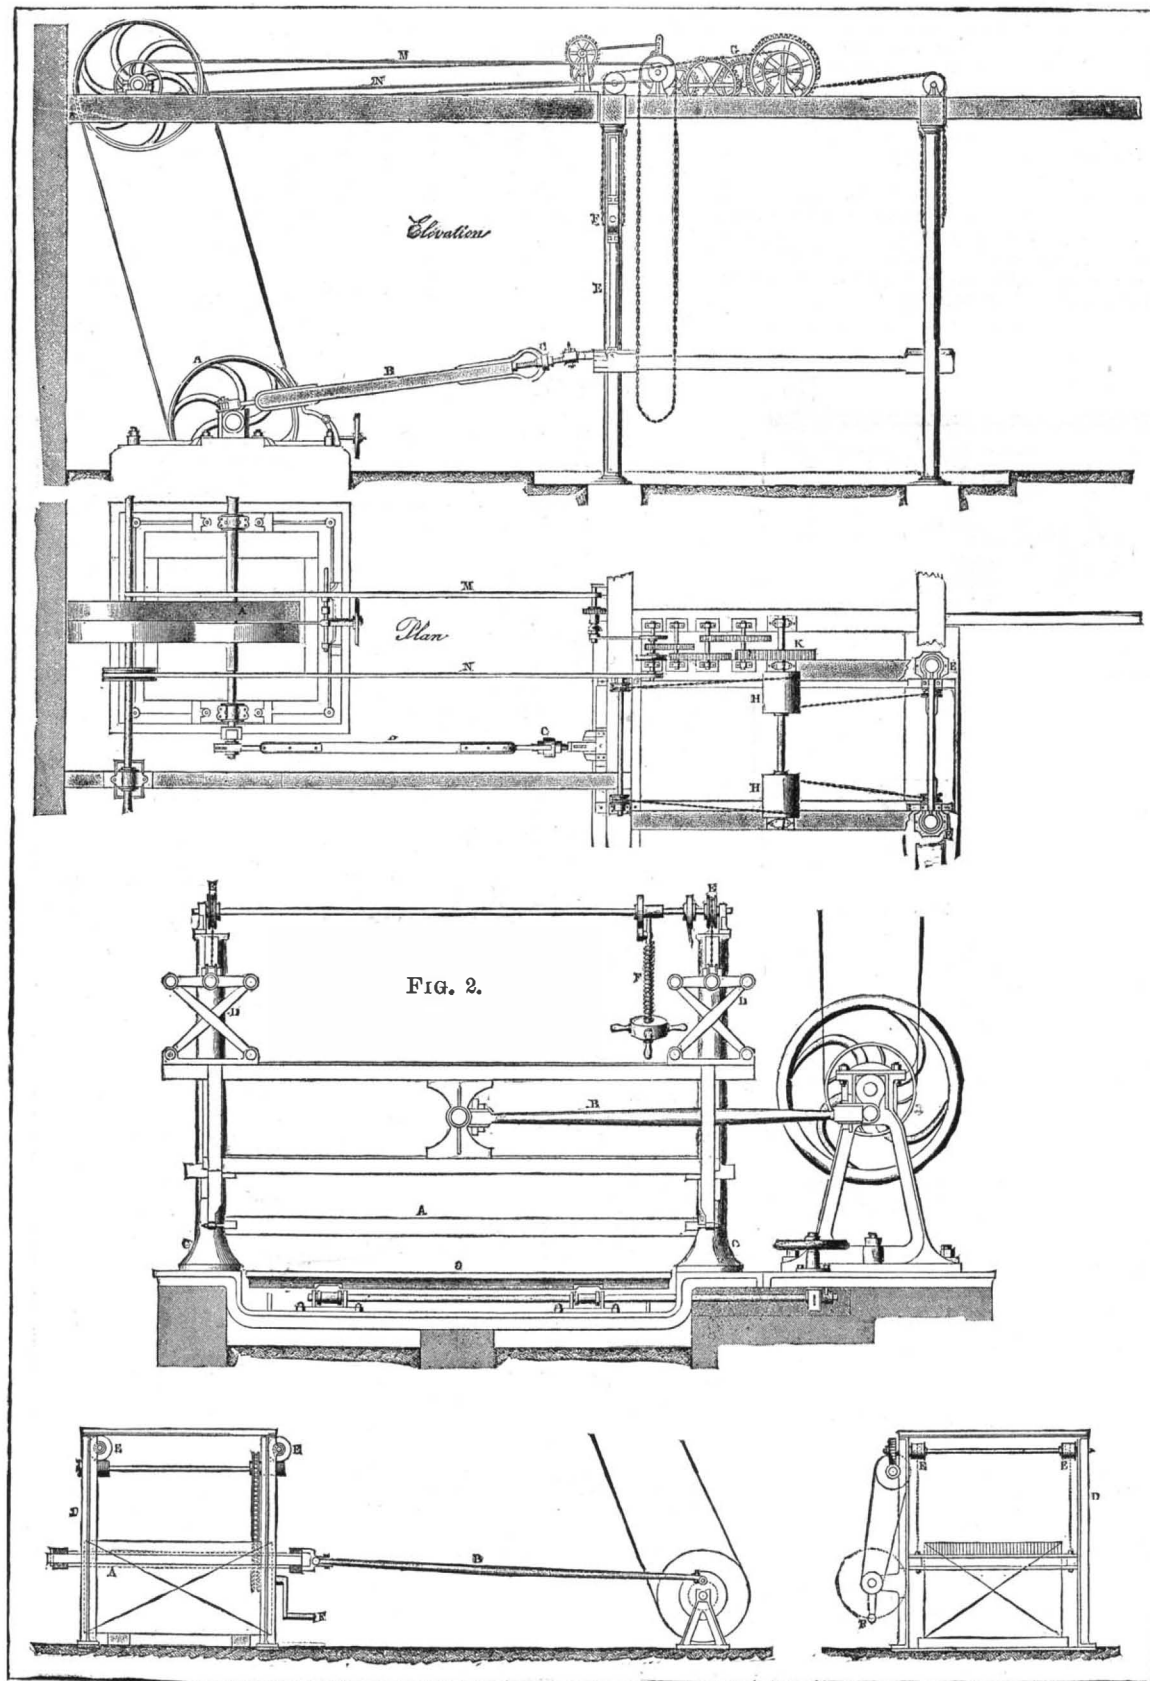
Plan and Elevation of a Stone Sawing Machine. FIG. 2.—High Speed Stone Saw. FIGS. 3 AND 4.—Elevations of Saw Frame.
